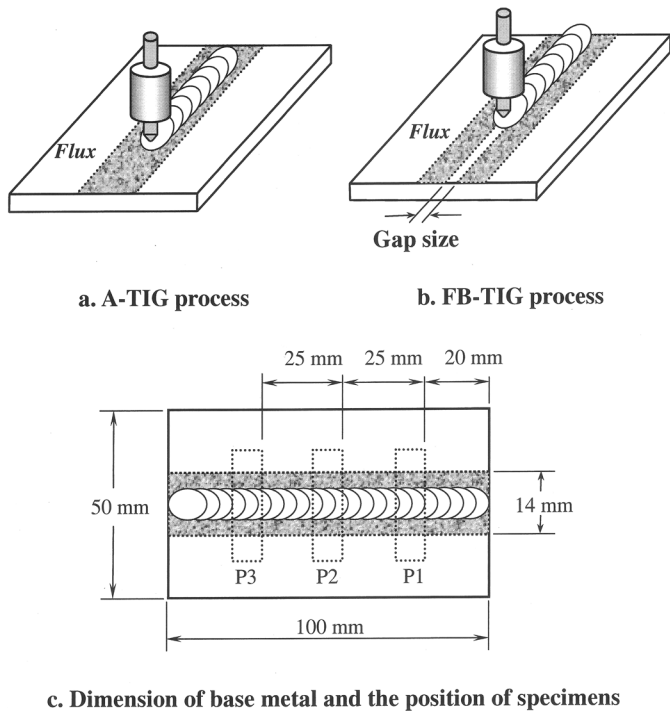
The A-TIG and FB-TIG welding process and its base metal.
